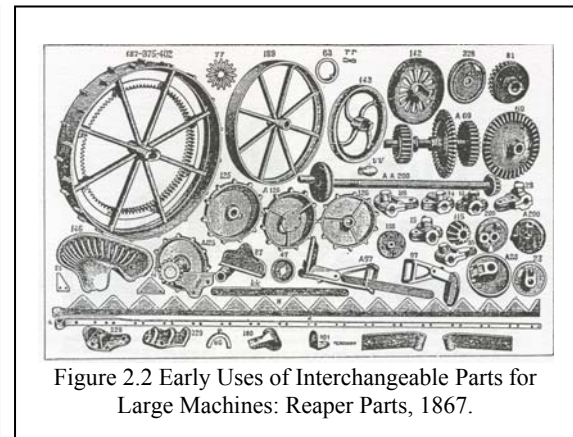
Early Uses of Interchangeable Parts for Large Machines: Reaper Parts, 1867.
